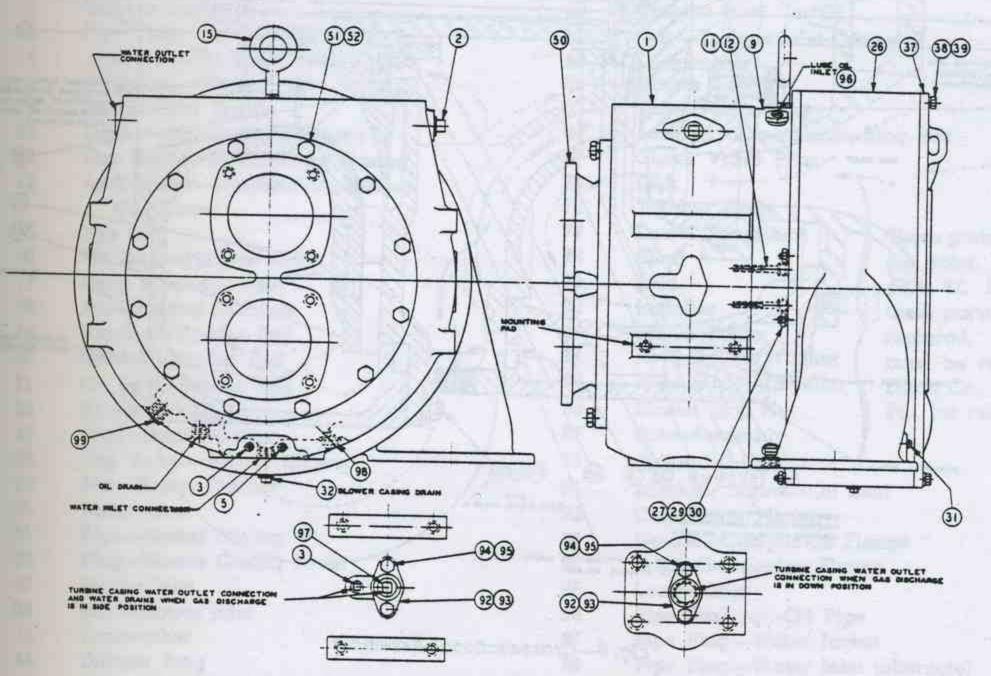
Outline Drawing L 20, L 40 and L 60 Turbocharger
